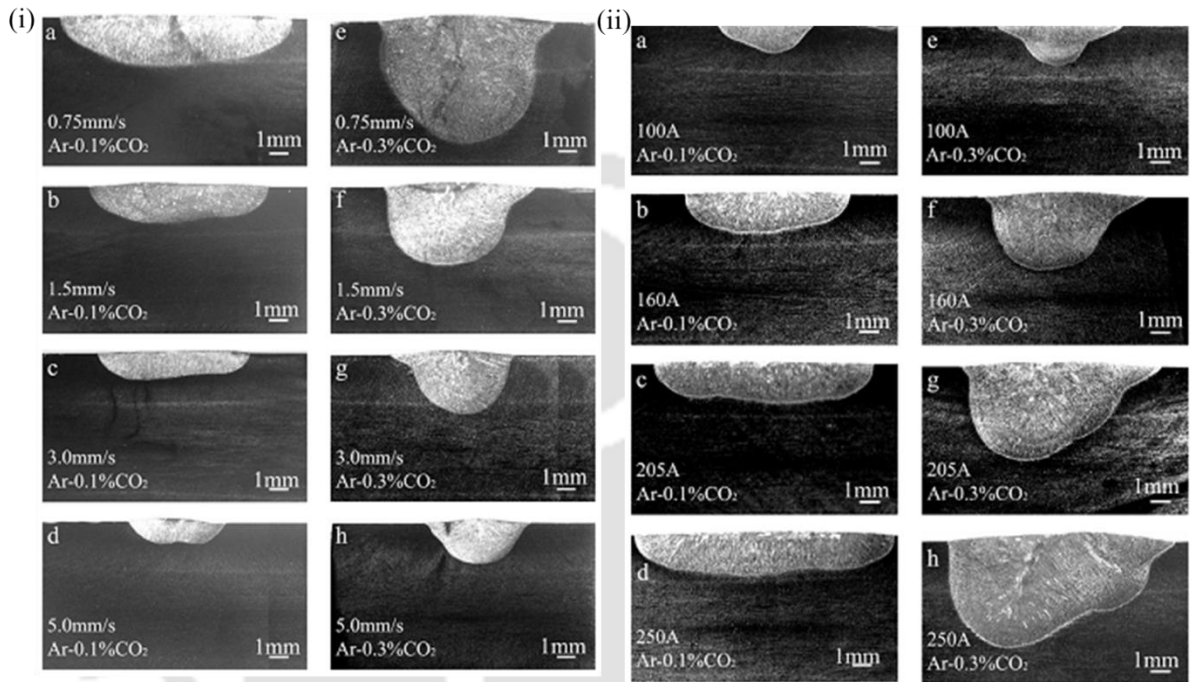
Weld bead shapes under Ar-0.1%CO₂ and Ar-0.3%CO₂, at different (i) welding speeds and (ii) welding currents [99].
